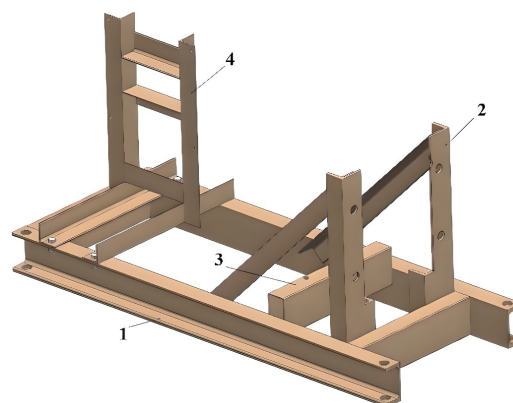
Support frame: 1- base, 2- rack for peristaltic pump connection, 3- beam for electric motor installation with mount, 4- rack for control panel fixing
